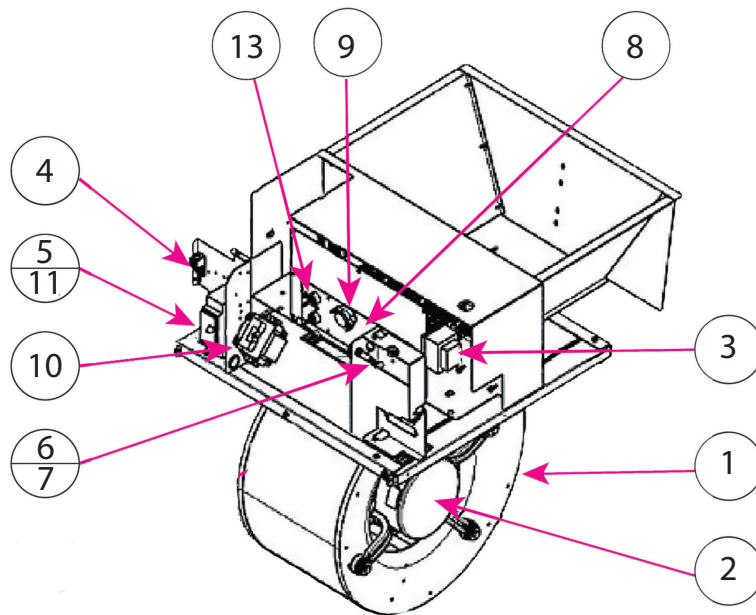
MMVT 36B, 48B Air Handler Replacement Parts Schematic
